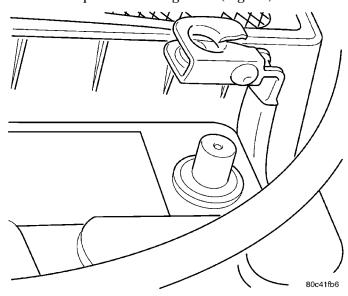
BATTERY NEGATIVE CABLE REMOVAL/ INSTALLATION
